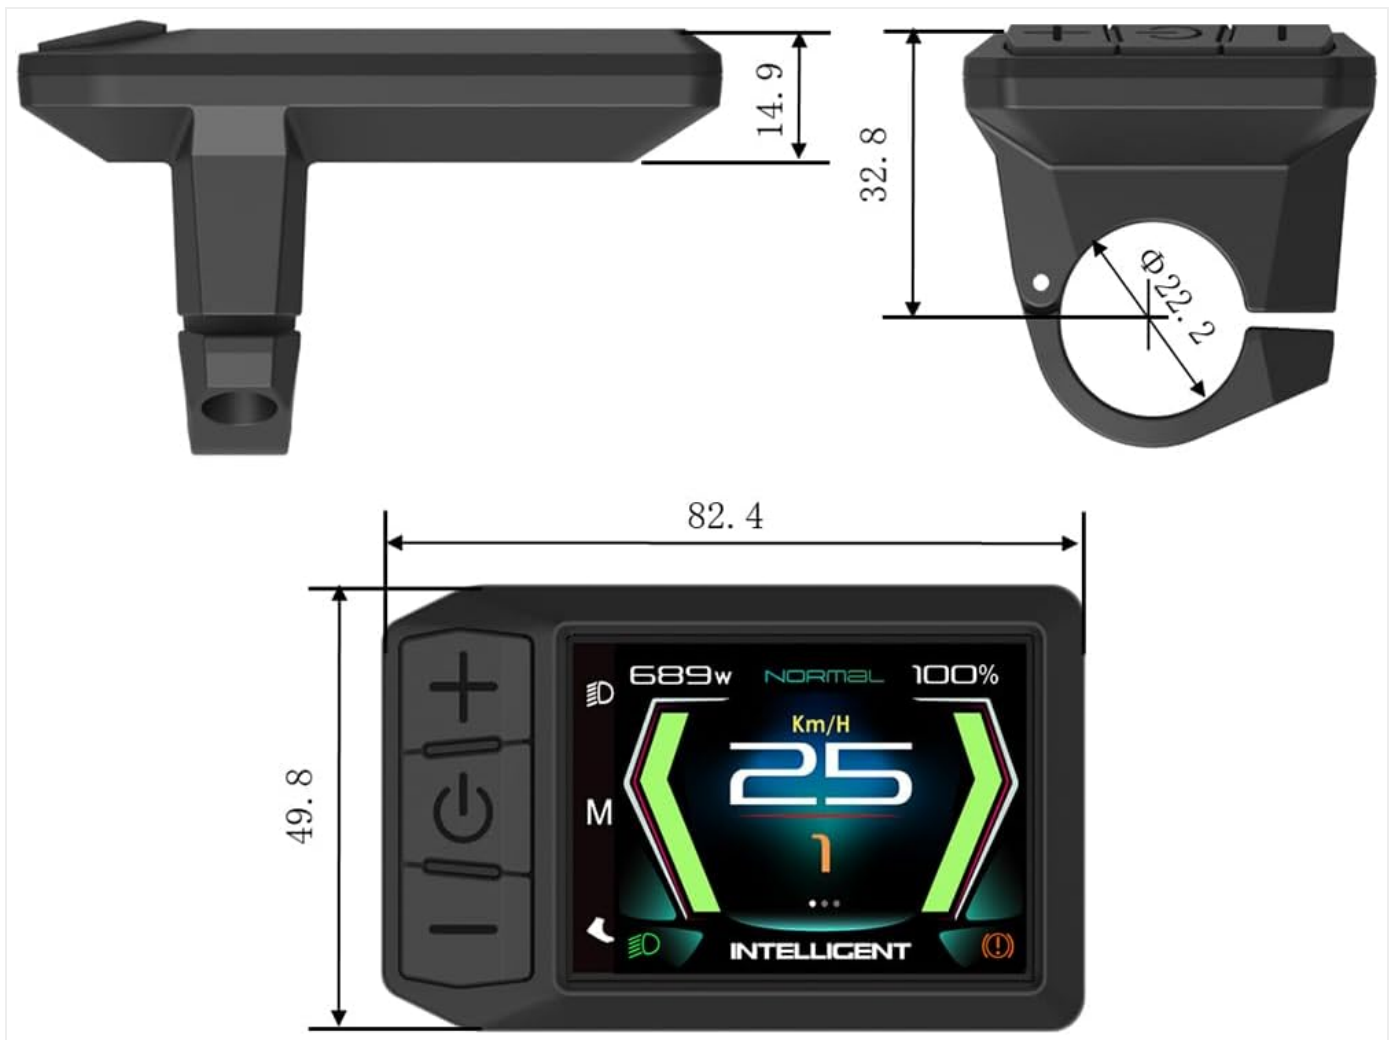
Technical dimensions of the 600C TFT Display, showing measurements in millimeters for width, height, and handlebar clamp diameter (Ø22.2mm).
